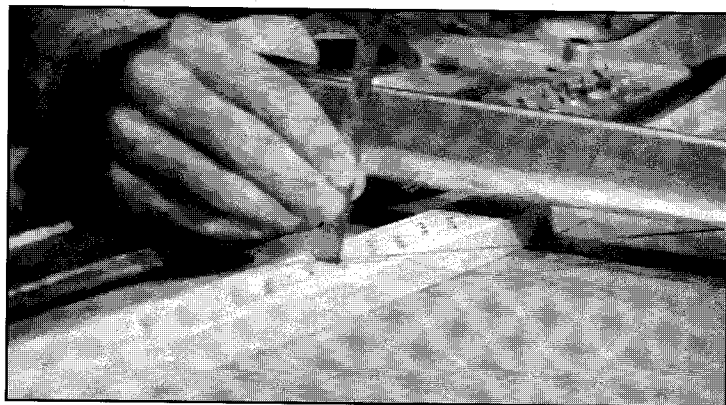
Measuring distance between sample string and top of planed bridge body.
